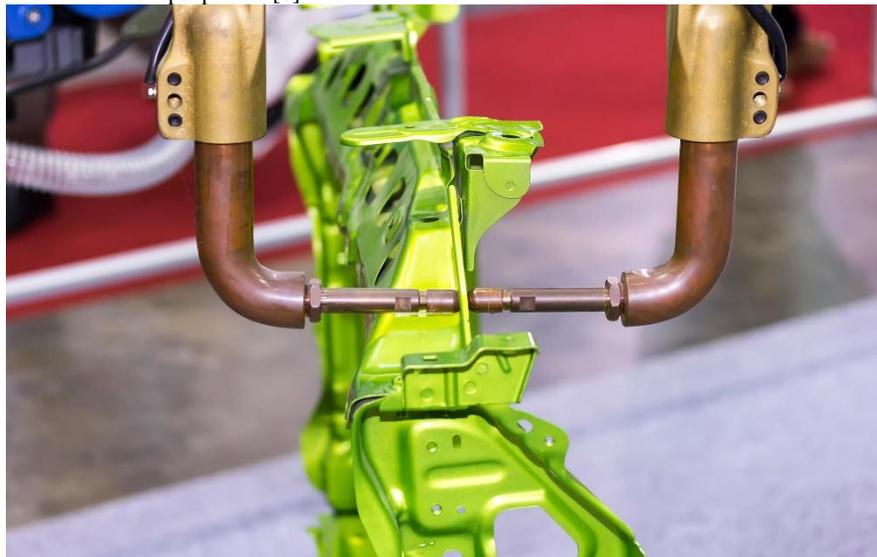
Example of resistance spot welding of aluminium sheet
